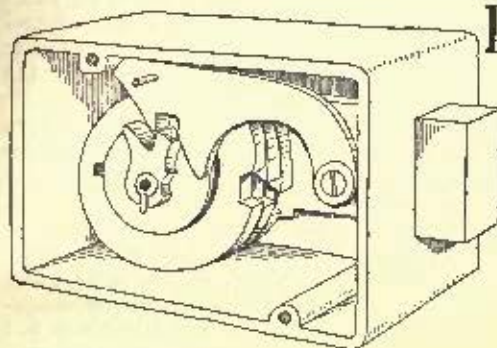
Dial Lock. Dismantled view showing internal mechanism.
